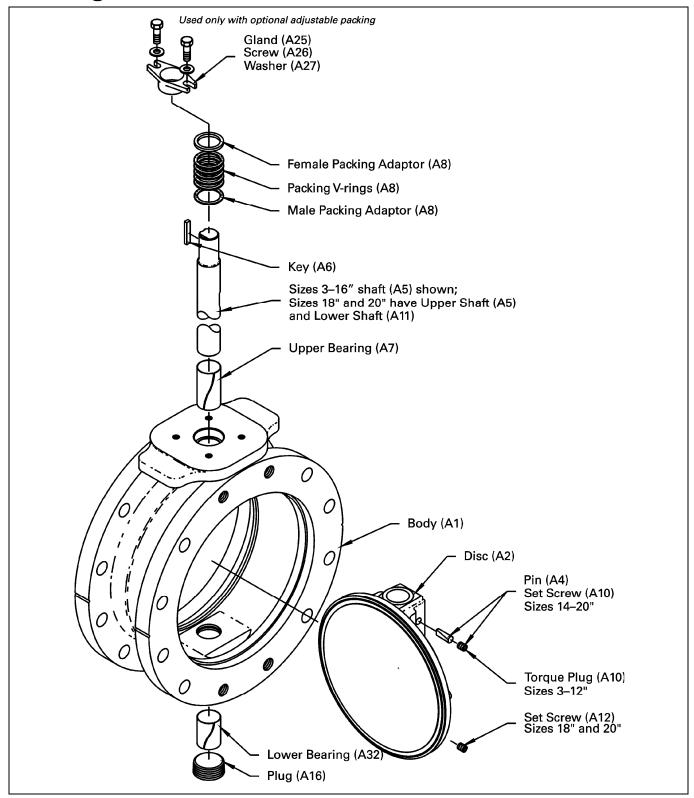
Disassembled 3–20" BAW AWWA Butterfly Valve
